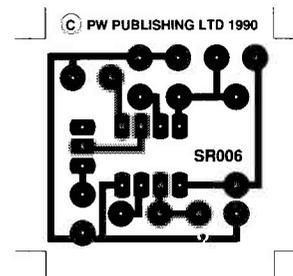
Full-size p.c.b. track plan and component placement drawing.
